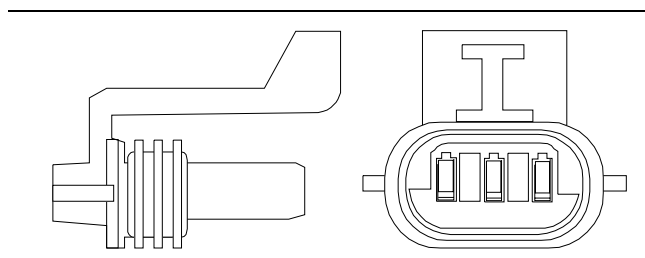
Three Terminal Accelerator Pedal Position Sensor Packard Electric Connector
